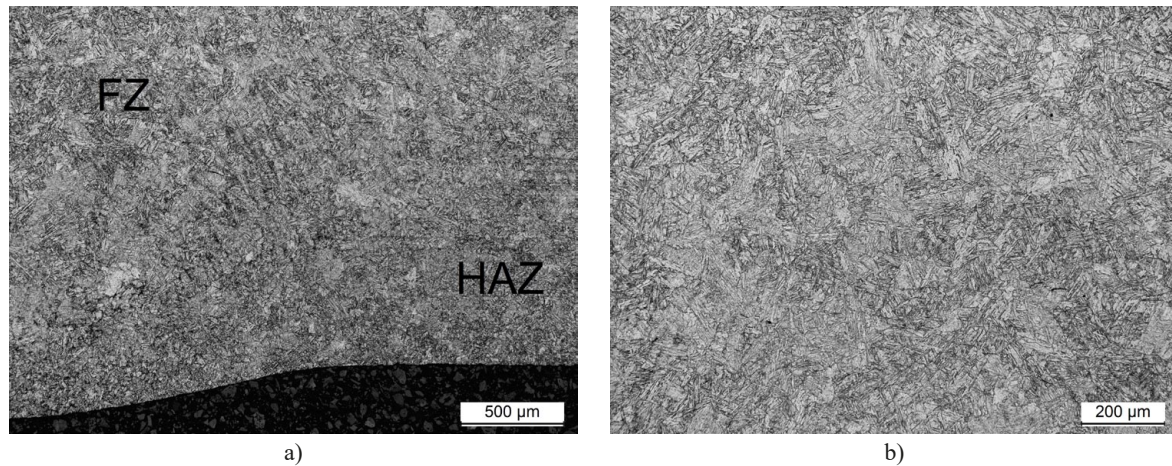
Microstructure of weld joint after heat treatment a) weld and HAZ b) fusion zone
